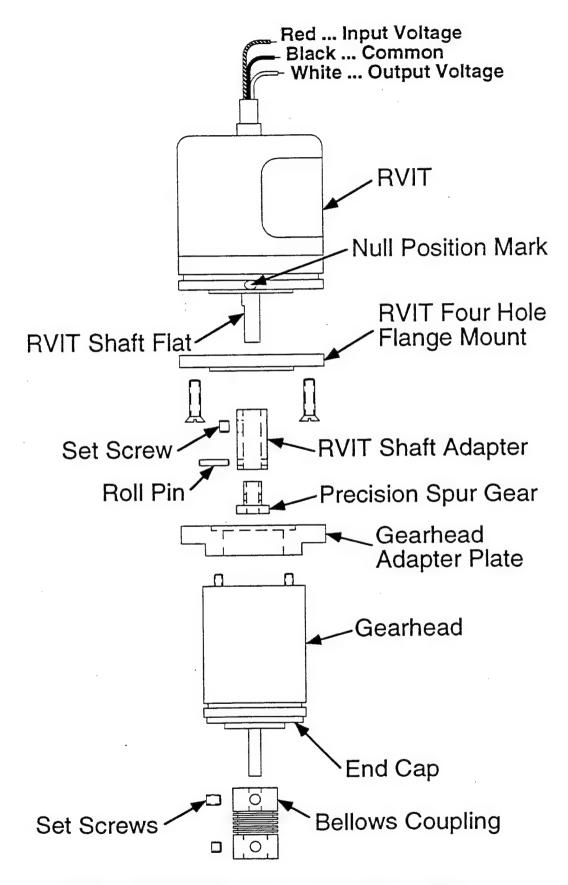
RVIT/Gear Head Subassembly: Exploded View.
